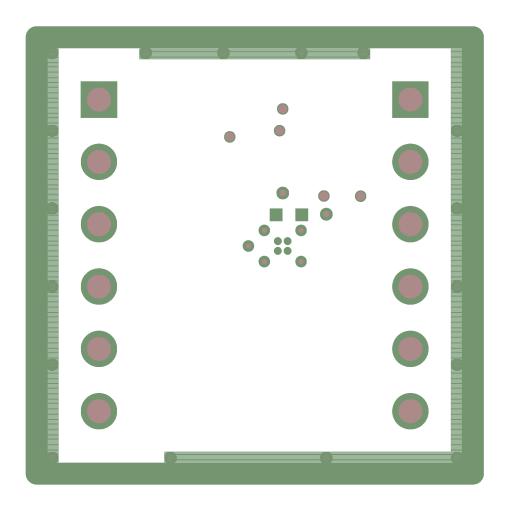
SMP-TPS61201-MVK Board Solder Mask – Bottom Side
